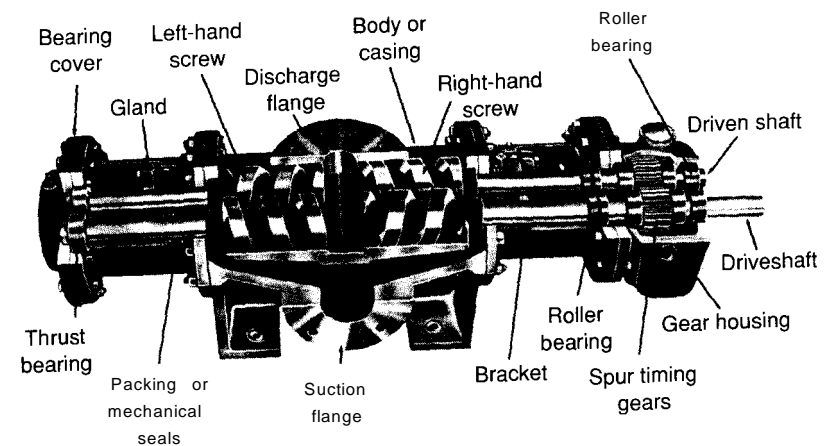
Twin-screw rotary pump with external bearings and timing gears. Courtesy Ingersoll-Dresser Pump Company.
